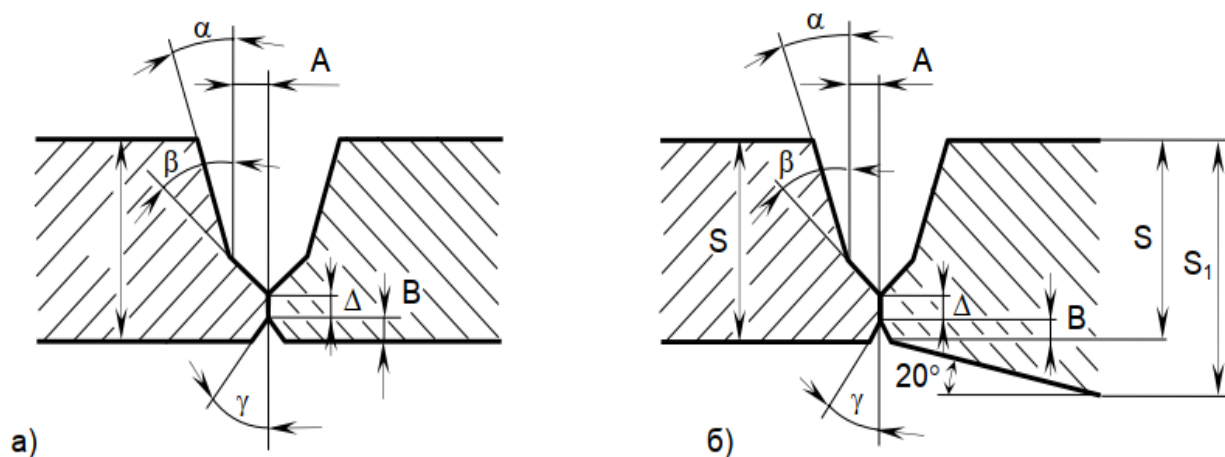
Geometric parameters of edge cutting and joint assembly for automatic bilateral welding with a solid wire in shielding gases: *a* - connection of pipes with the same wall thickness; *b* - connection of pipes with different wall thickness
